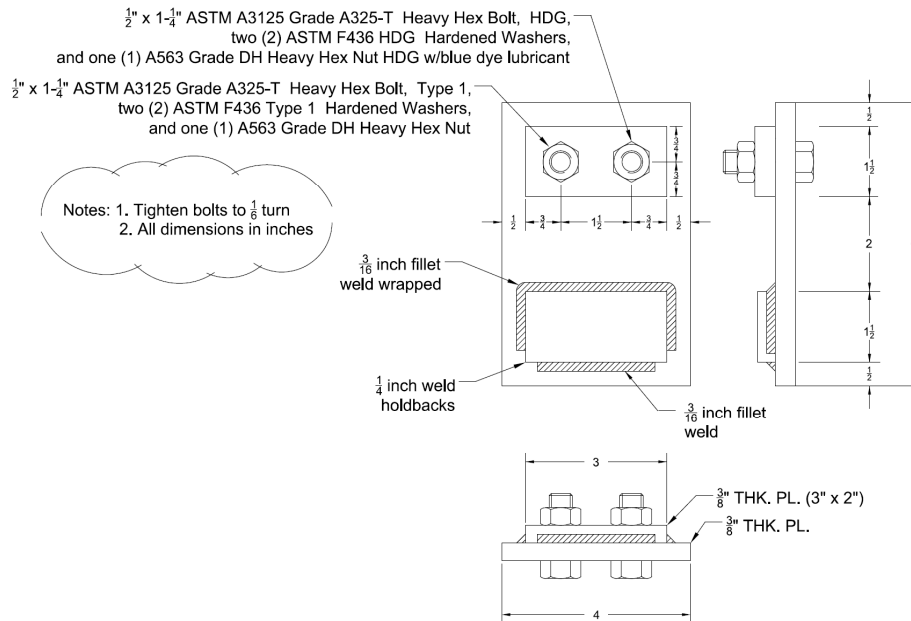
AutoCAD Drawing for Plate with Bolted and Welded Features
